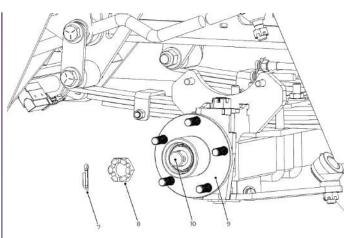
Cotter Pin, Castle Nut and Hub Removal.
